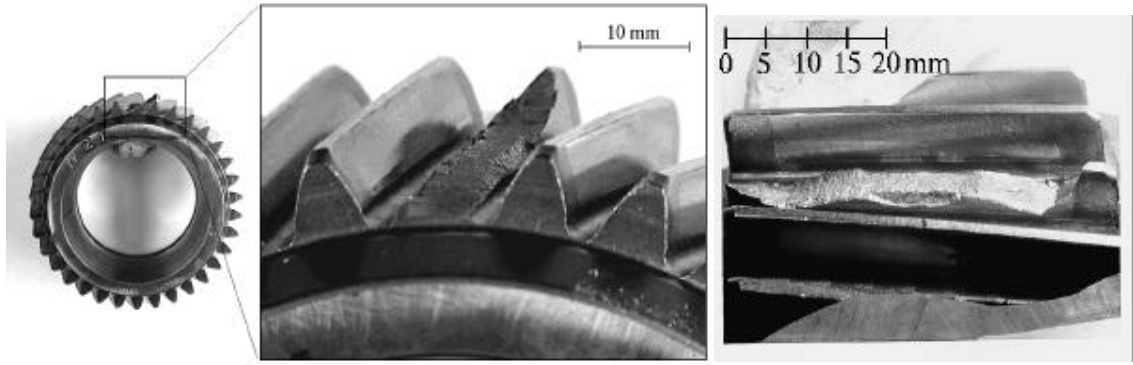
Typical gear failure - Tooth Interior Fatigue Fracture, TIFF [16]
